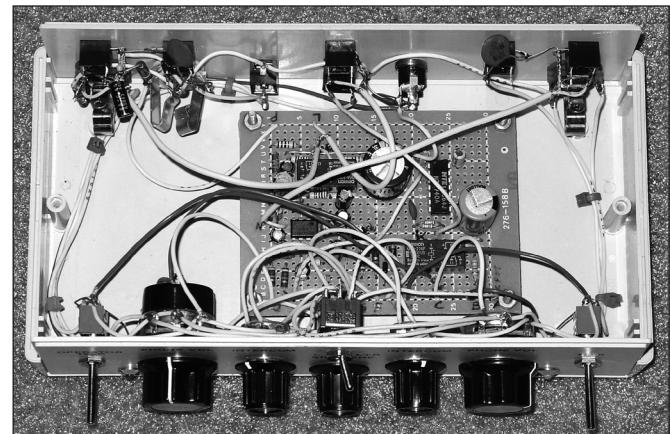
Inside view of the audio interface box. A RadioShack project board is used for most components.
